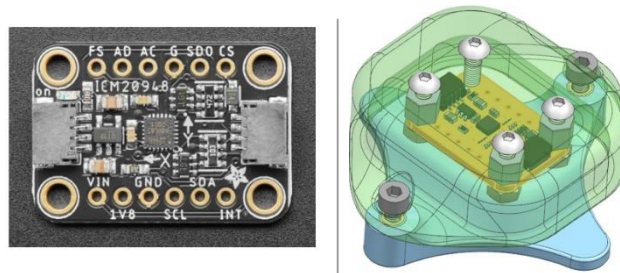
IMU hardware and mounting design: (a) Adafruit ICM-20948 9-DoF IMU breakout board; (b) CAD model of the designed enclosure used to mount and align the IMU on the vehicle..
